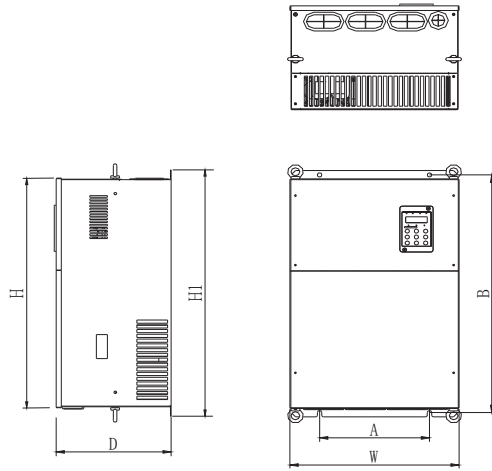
Schematic Diagram for Physical Dimensions and Mounting Dimensions of MD280T18.5G/22P to MD280T400G/450P
